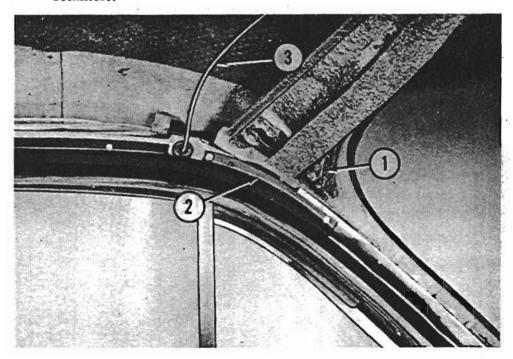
Windshield Header Bar, Headlining Front Retainer and No. 1 Listing Wire Grommet.
